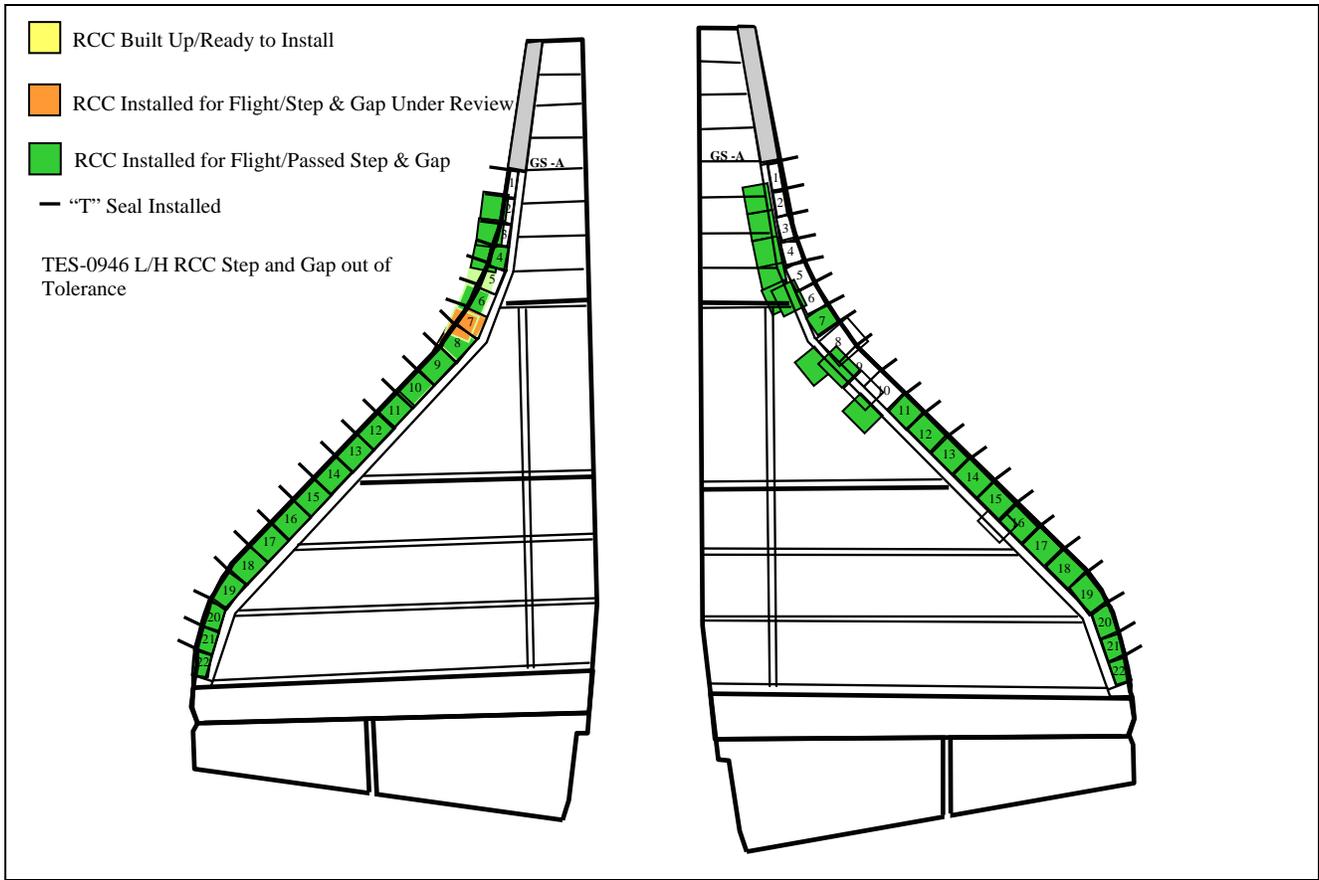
OV-103 RCC Inspection and Installation Status (NASA)
